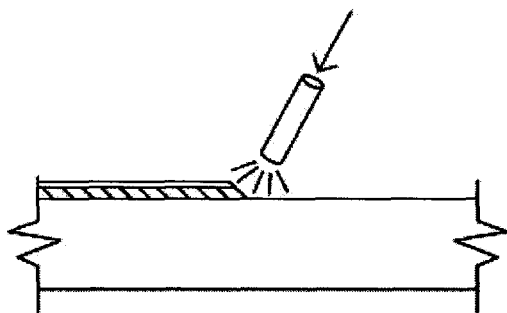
Illustration of Flux Core Arc Welding
